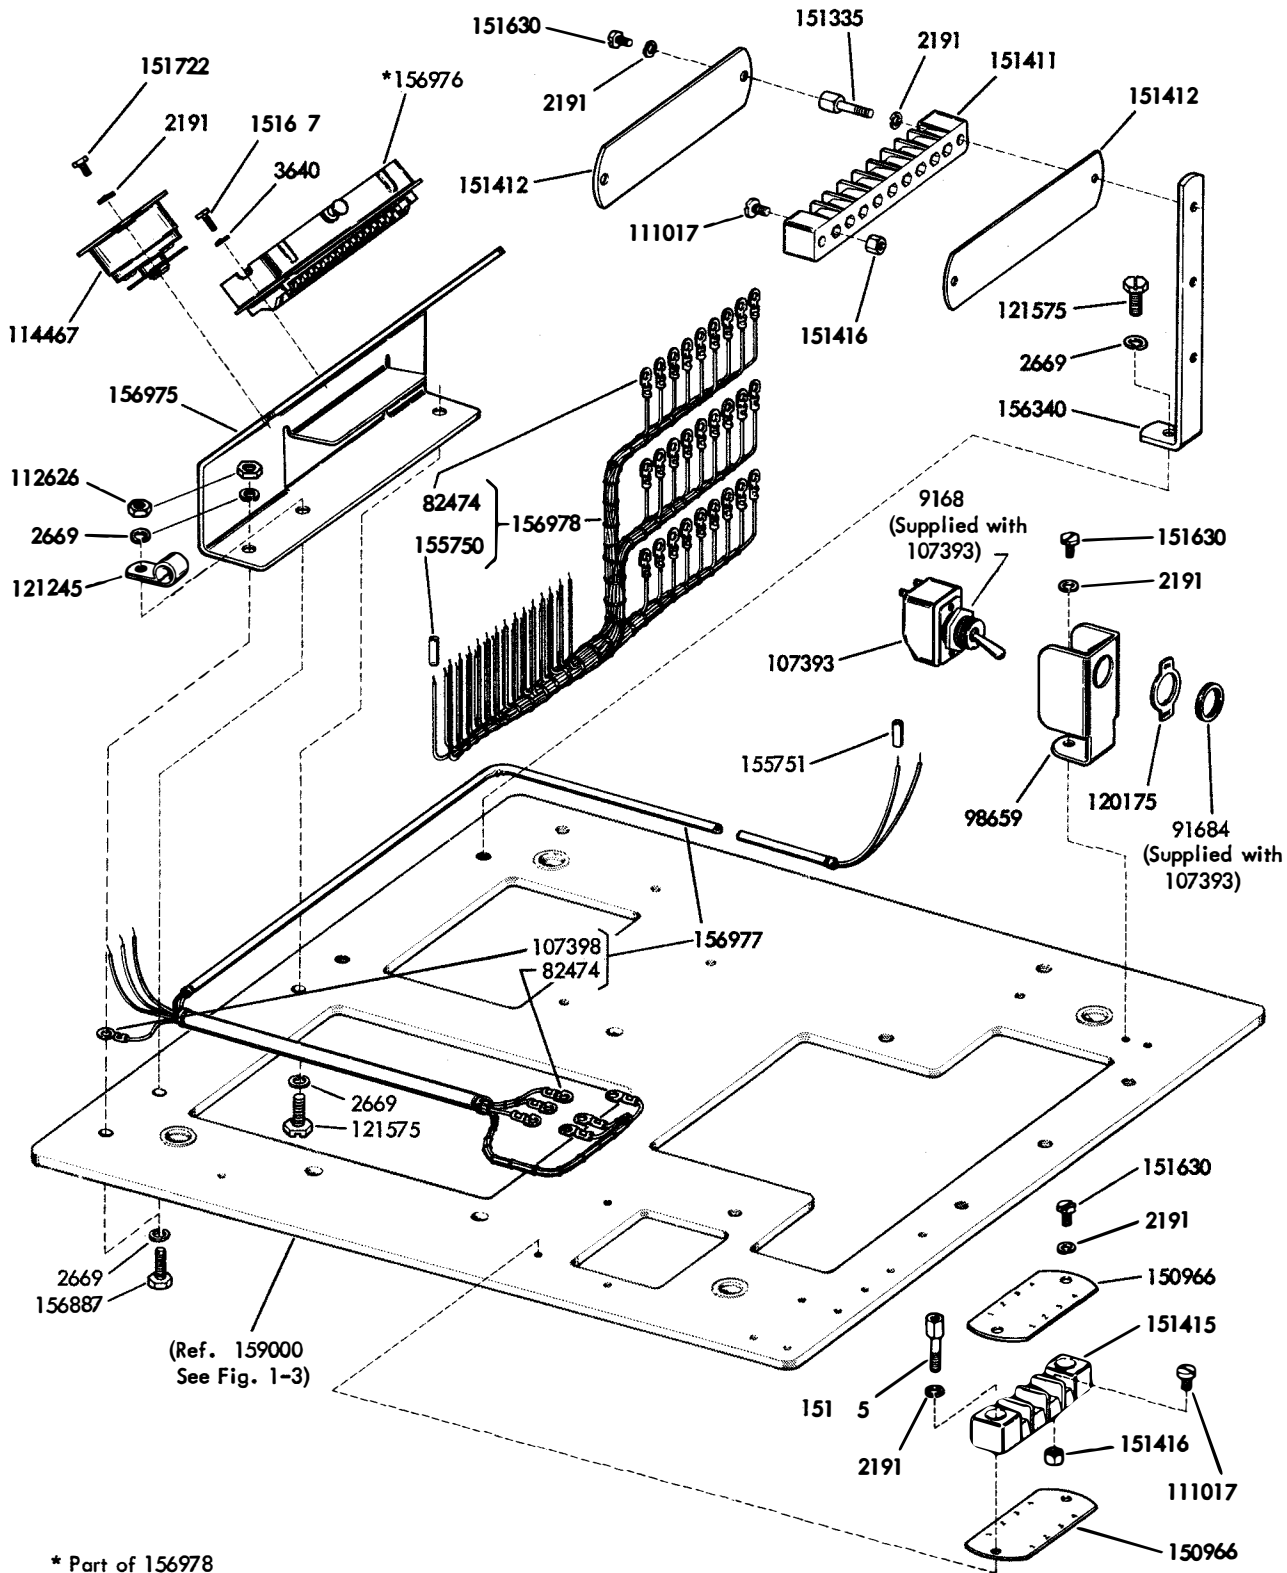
BASE ASSEMBLY - VIEW 1
